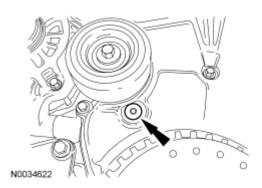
Identifying Special Tool Courtesy of FORD MOTOR CO.
